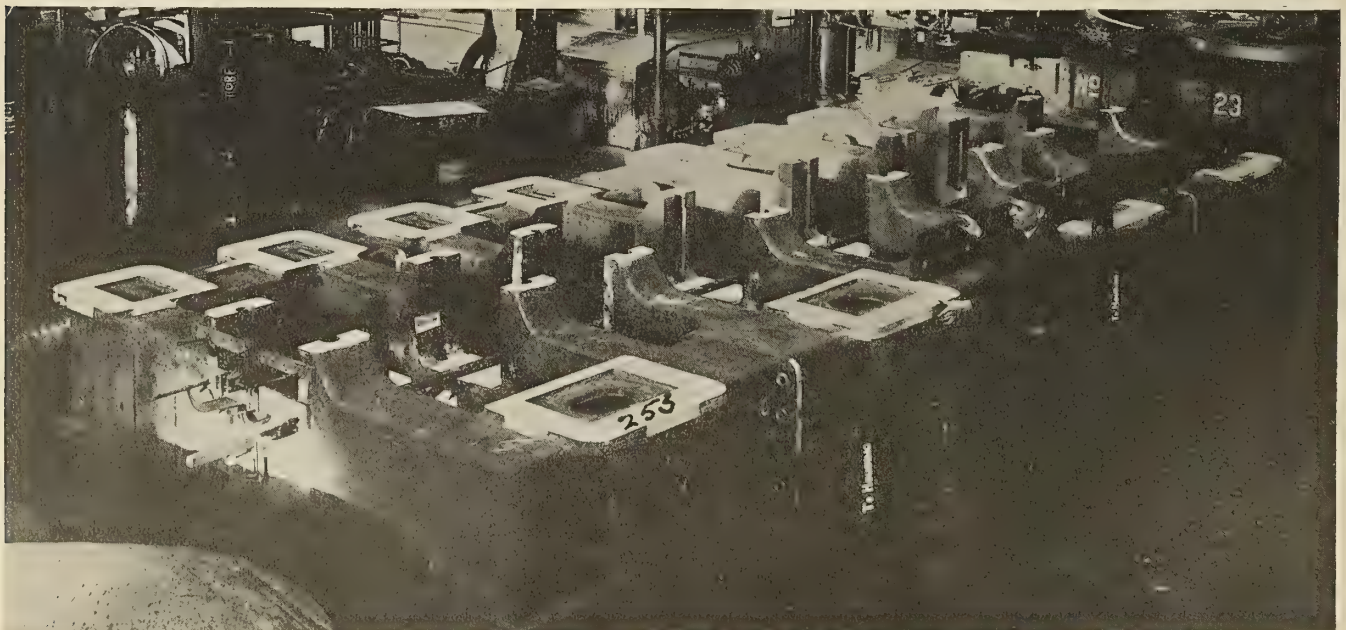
Four Sections (the Complete Bedplate) Clamped Together Are Lined Up and Then Laid Out for Drilling, Etc.
